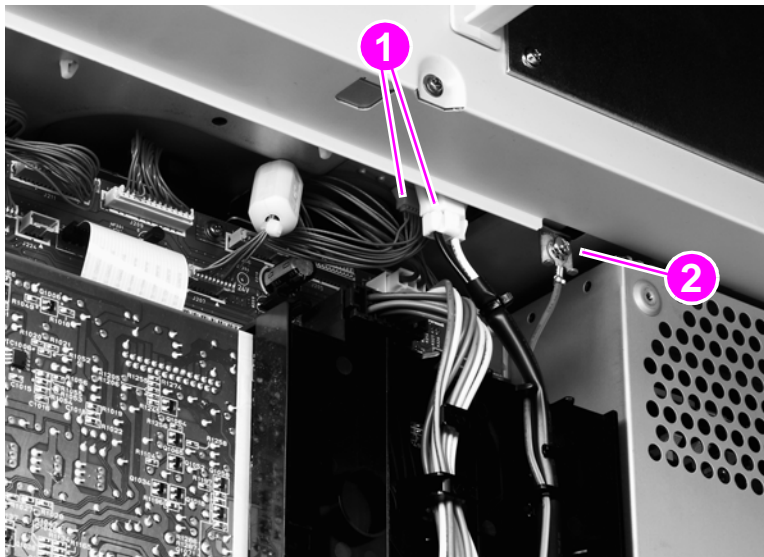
Scan engine (HP LJ 9000mfp/9040mfp/9050mfp shown) (1 of 7)
